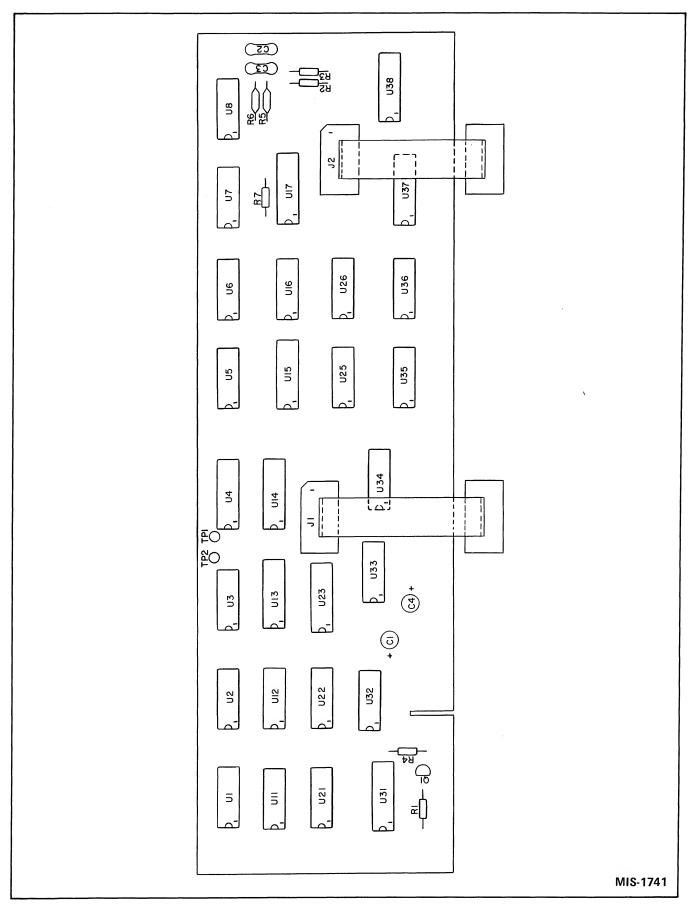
A10A2 Fast R² A/D Converter Digital PCB Assembly
